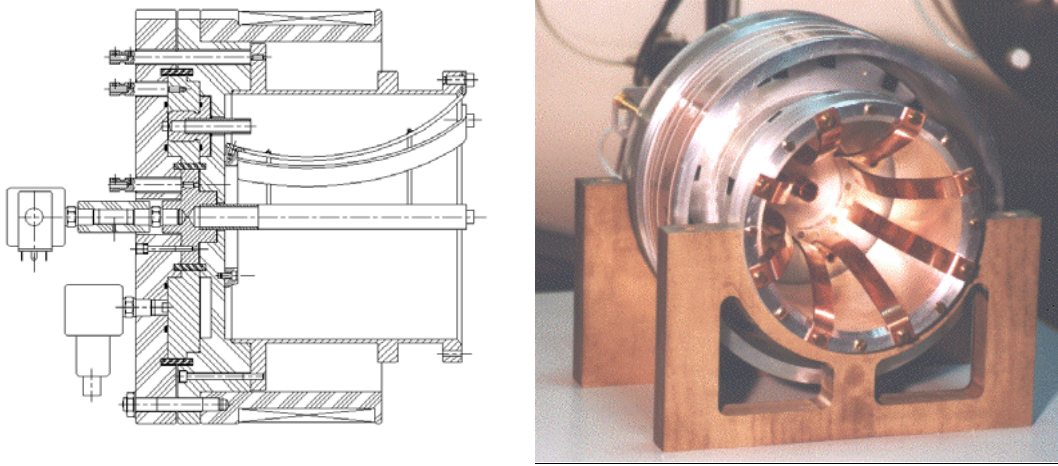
Schematic drawing (left) and picture (right) of the thruster assembly.
